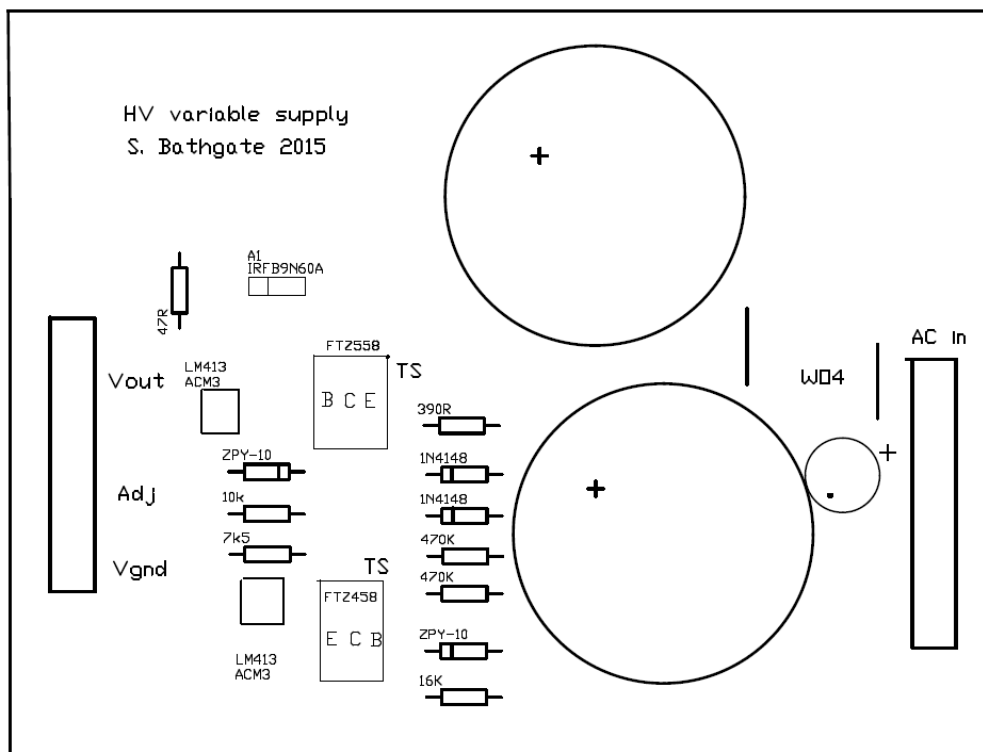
PCB layout of 160V DC power supply top overlay showing component locations
